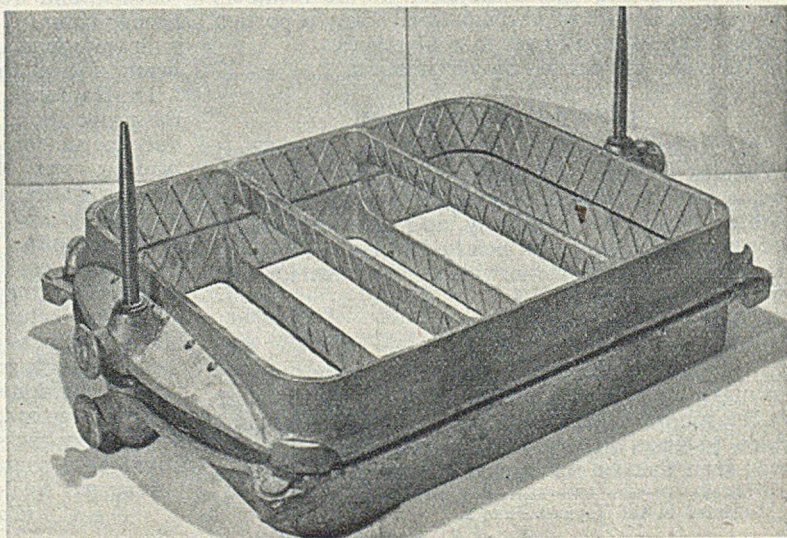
(ABOVE).—GENERAL APPEARANCE OF COIL-SPRING MOULDING-BOX PIN.
